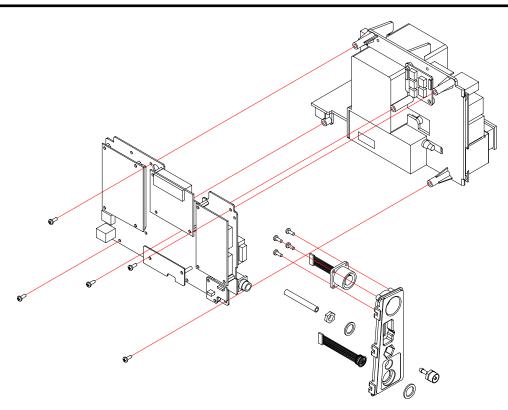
Rear Case Disassembly - Main Board, Side Connector Cover, ECG Connector, CO₂ Connector
